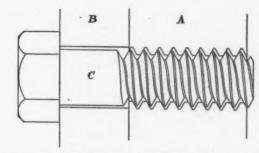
SCREW STANDARD BUT THREADED HOLE TOO LARGE
